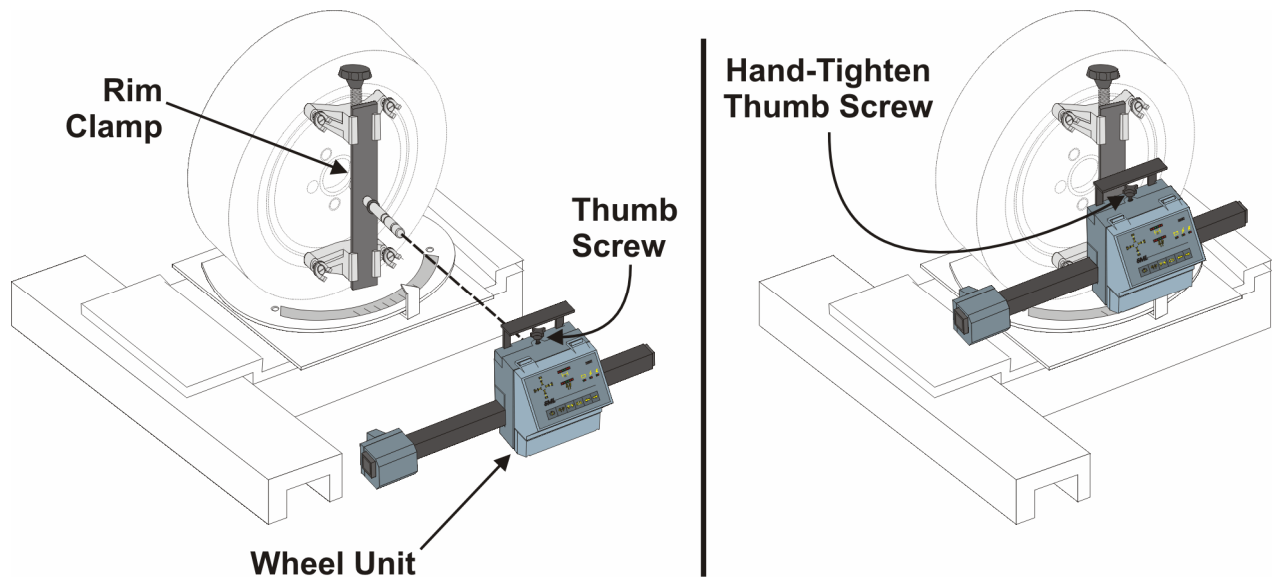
Applying Rim Clamps to Vehicle Wheel
